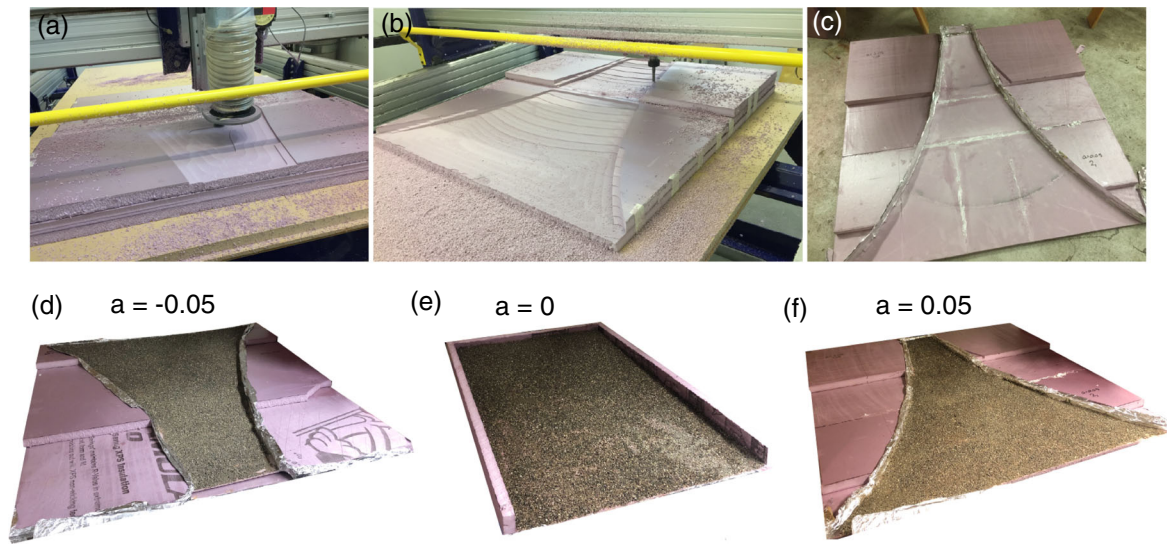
(a) First step of CNC fabrication and (b) second step of CNC fabrication of engineered hillslope. (c) Smooth surface finish with cracks filled in using insulation foam and epoxy, sanded flat to the surface. Aluminum is used to line the edges of the model. The lower half of the figure shows completed models after the application of sand to the surface to increase hydrophilicity. 48
